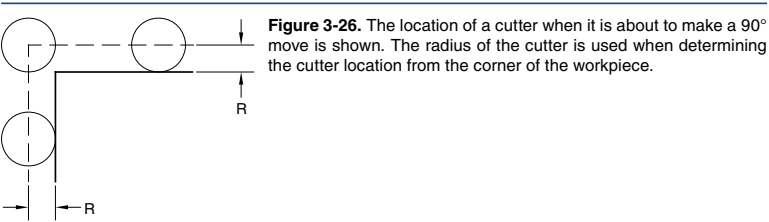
The location of a cutter when it is about to make a 90° move is shown. The radius of the cutter is used when determining the cutter location from the corner of the workpiece.
